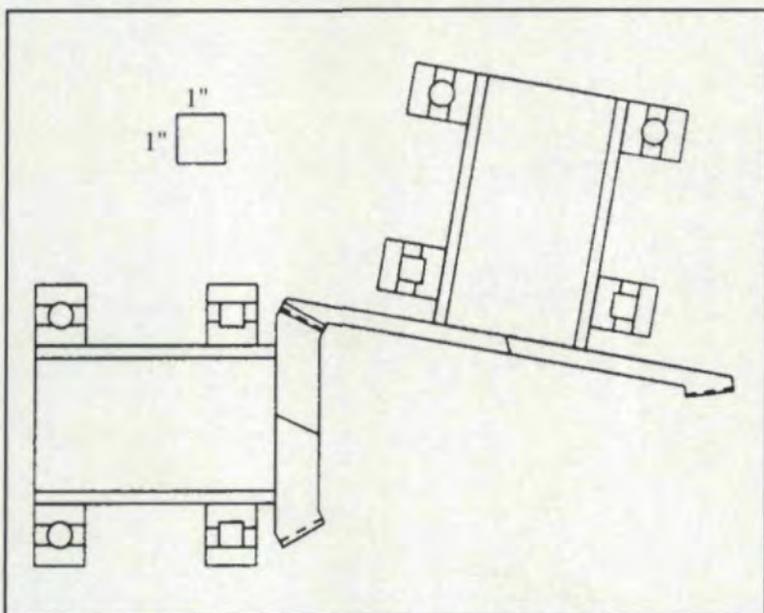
100° shaft angle design with a life of 18,260 hrs.
